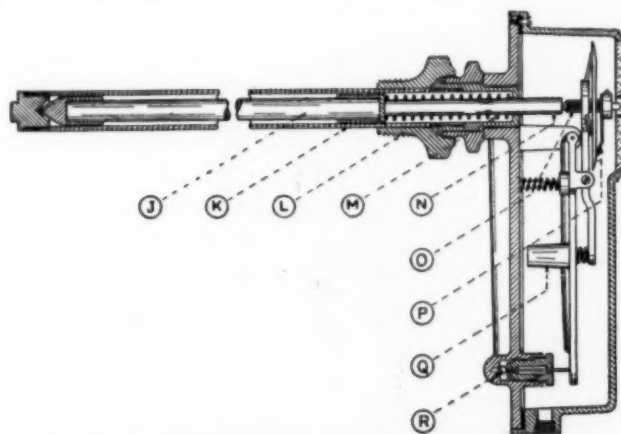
EXPANSION STEM AND CONTROLLER MECHANISM.
